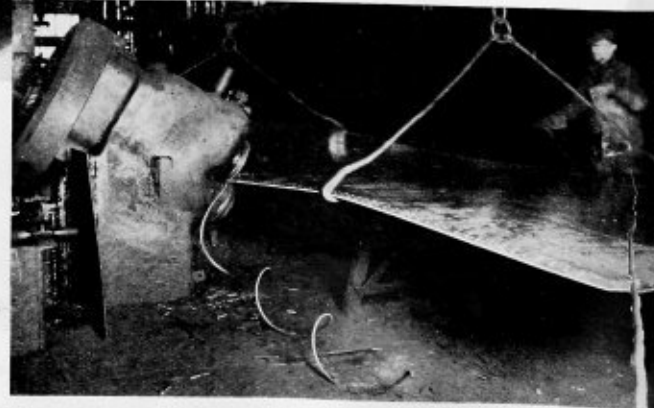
(Above) Hydraulic riveting with pure nickel rivets. Fig. 7.—(Left) Interior of tank car. Fig. 8.—(Below) Bevel shearing nickel-clad steel plate for tank car
